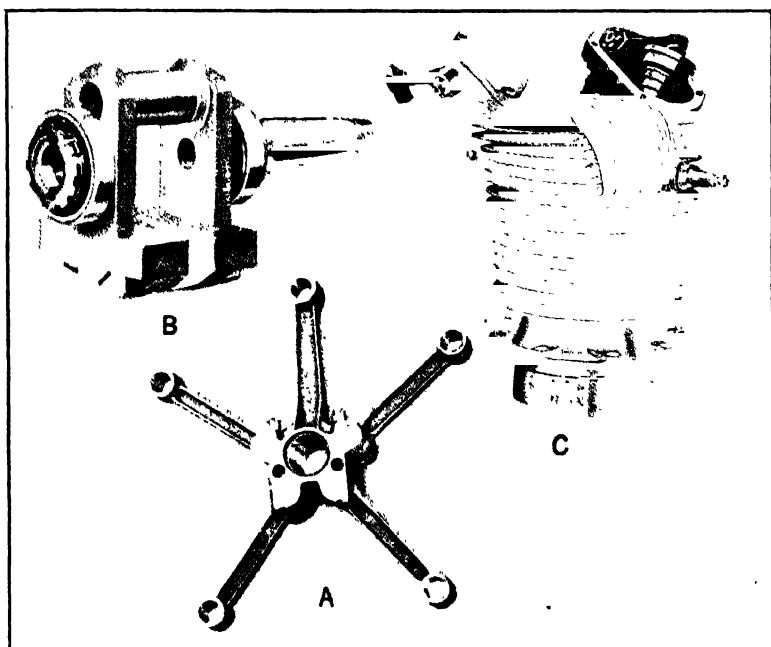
Parts of LeBlond Five-Cylinder Radial Engine. A—Master Connecting Rod Assembly. B—Crankshaft and Ball Bearing Assembly. C—LeBlond Cylinder.
